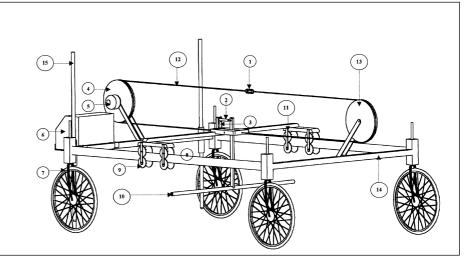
Pendulum measuring device (1-cable tension clamp, 2-distance meter, 3- distance meter holder, 4-driving disc, 5- electric motor, 6- control box, 7- wheel and fork blades, 8- running tubes, 9guide wheels, 10- pendulum, 11- pendulum carrier, 12-cables, 13- guide disc, 14- transverses, 15- pin
